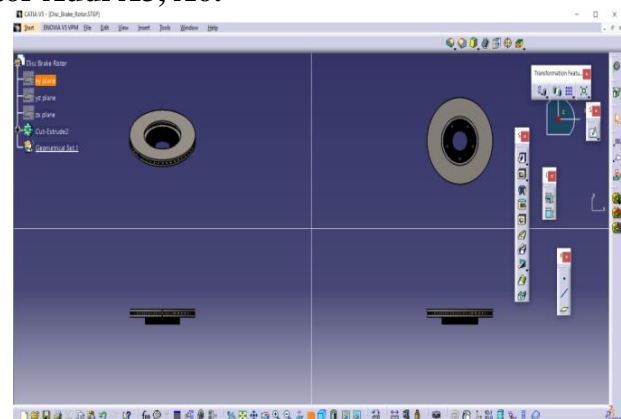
Final Model of A Vented Disc Brake Rotor A6
